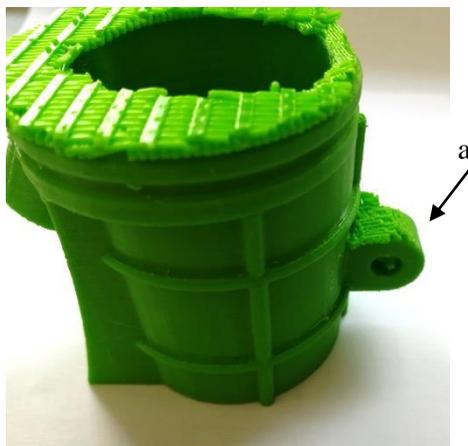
Auxiliary holder (a) for 3D printing of a fastening tab.
